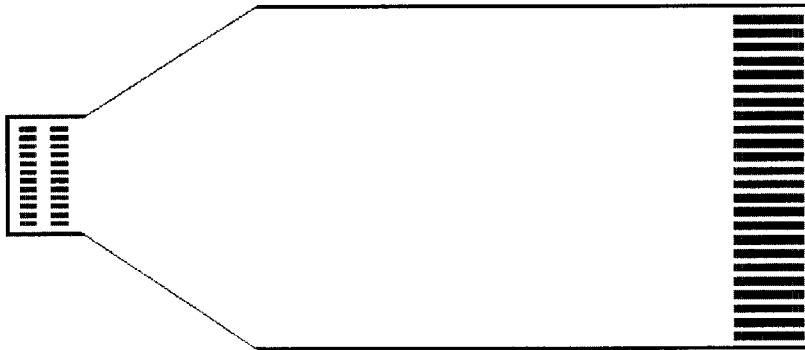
Schematic of the flexible PCB. The wires connecting the left small pads and right big pads are not shown.
